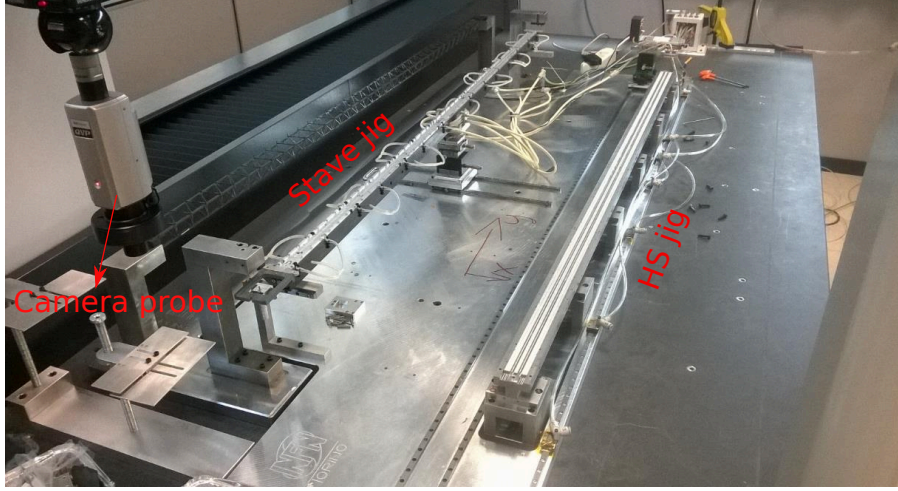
Measuring table of the coordinate measuring machine on which the HS and Stave jigs are placed. The micrometric alignment of the components is performed with the camera probe indicated in the picture.
